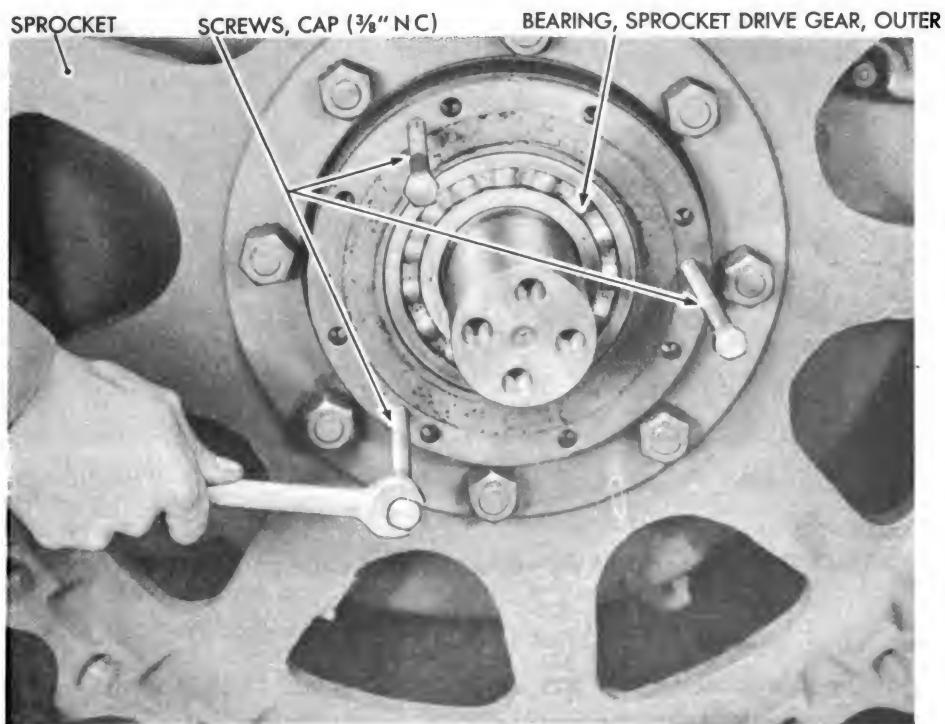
Sprocket Drive Gear Outer Bearing Cage Removal
